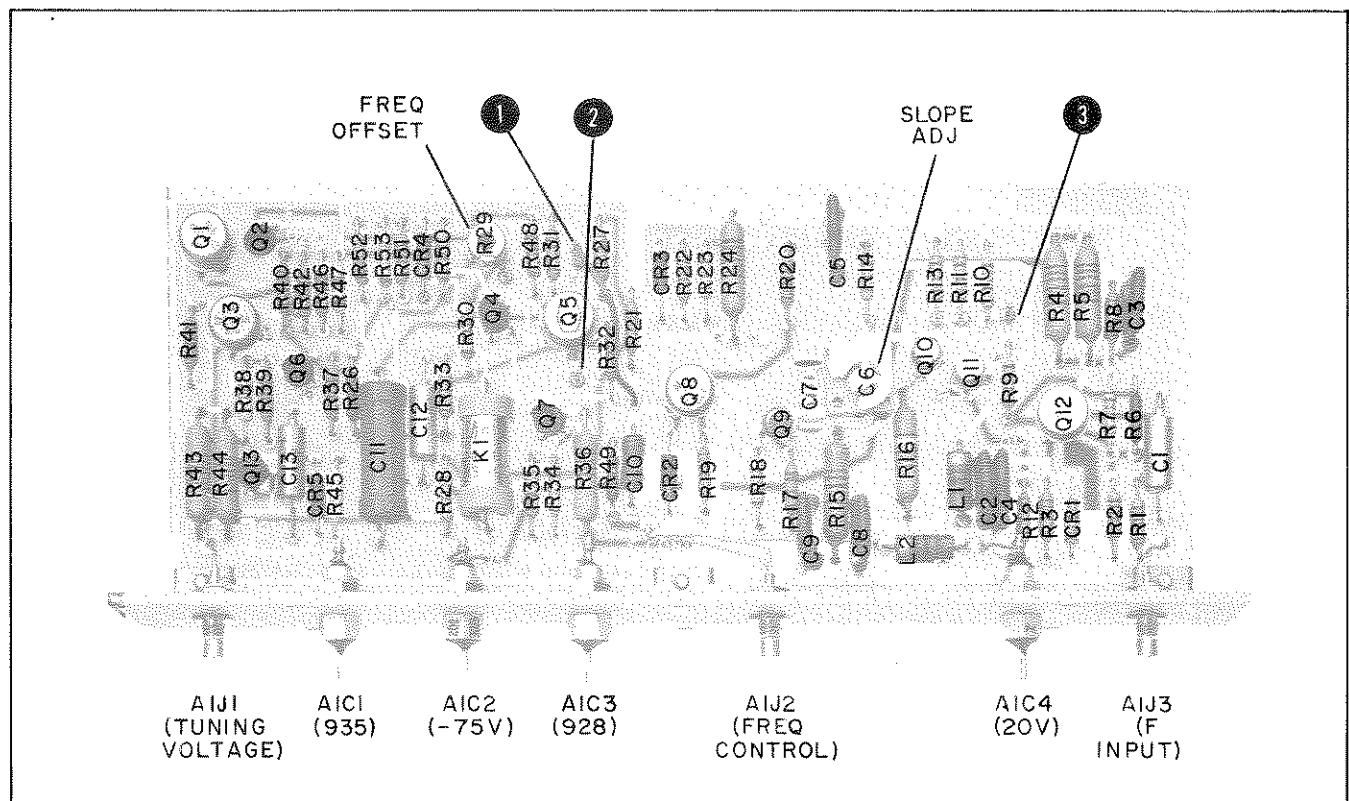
Component Identification A1A1 Discriminator Assembly
